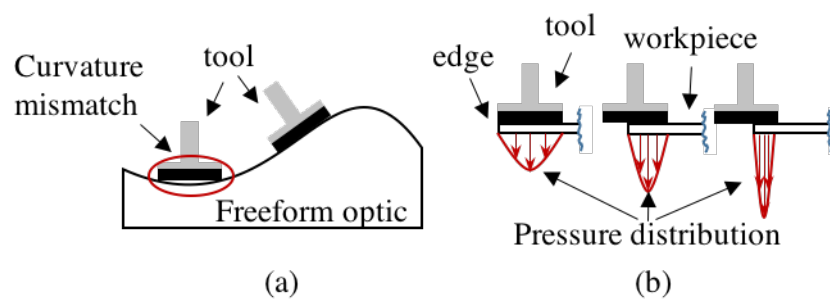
(a) Tool and freeform workpiece curvature mismatch (b) uneven pressure distribution of tool near workpiece edge
